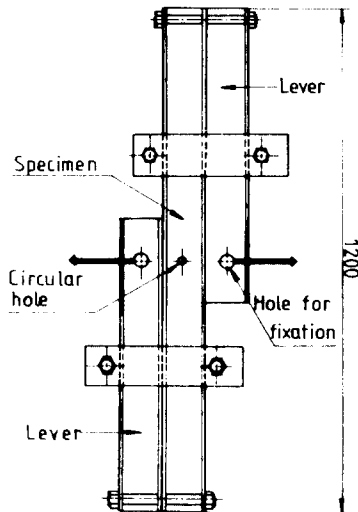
Configuration of assembled specimen with I shape steel (I-100×80×9×12.5mm)
